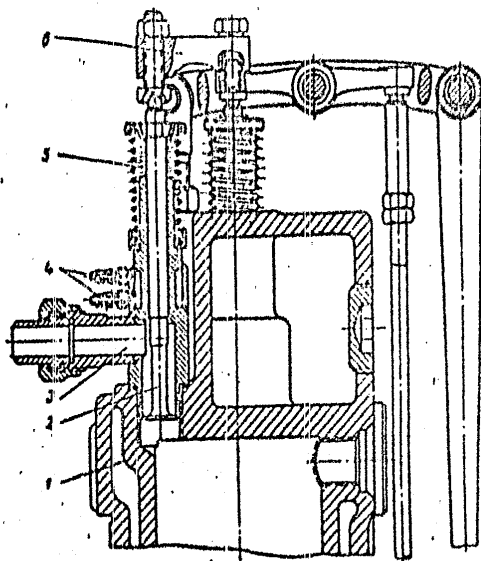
Scheme of the soot-collecting valve setup in the cylinder head of the engine NT 9-2 (IT 9-2): 1 - cylinder head; 2 - soot-collecting valve; 3 - outlet of exhaust gases; 4 - coolant supply to the valve sleeve; 5 - valve spring; 6 - valve drive.
